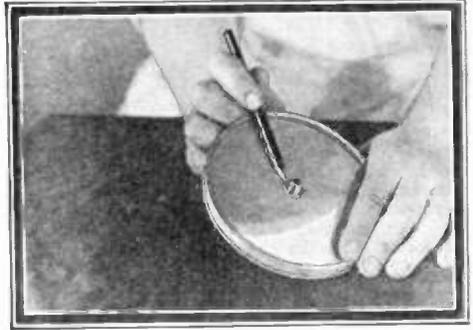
The bushing is then fitted through the center hole of the disc and the retaining nut is fastened down. Care must be taken that the insertion of the bushing does not throw the disc out of line.
